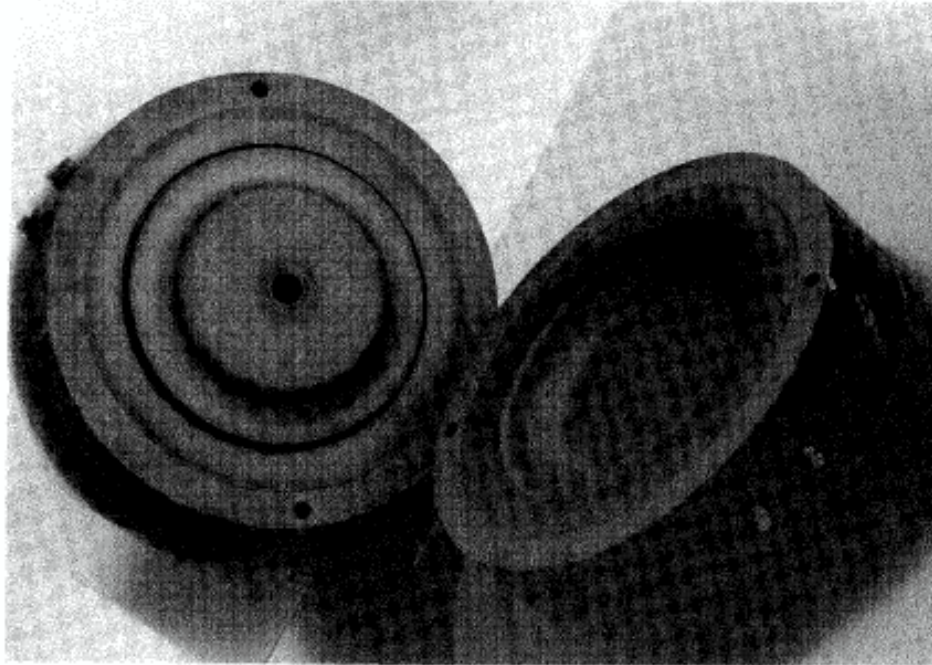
A 420 stainless steel sprayed injection mold for a flying disk.
